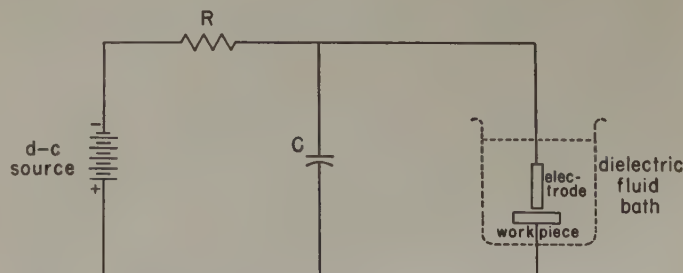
Schematic diagram of circuit of spark cutting machine used by Lazarenko
